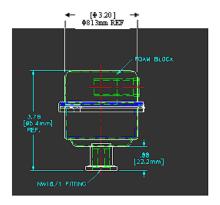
SH-110 Silencer/ Filter Can, Kit Dimensions
